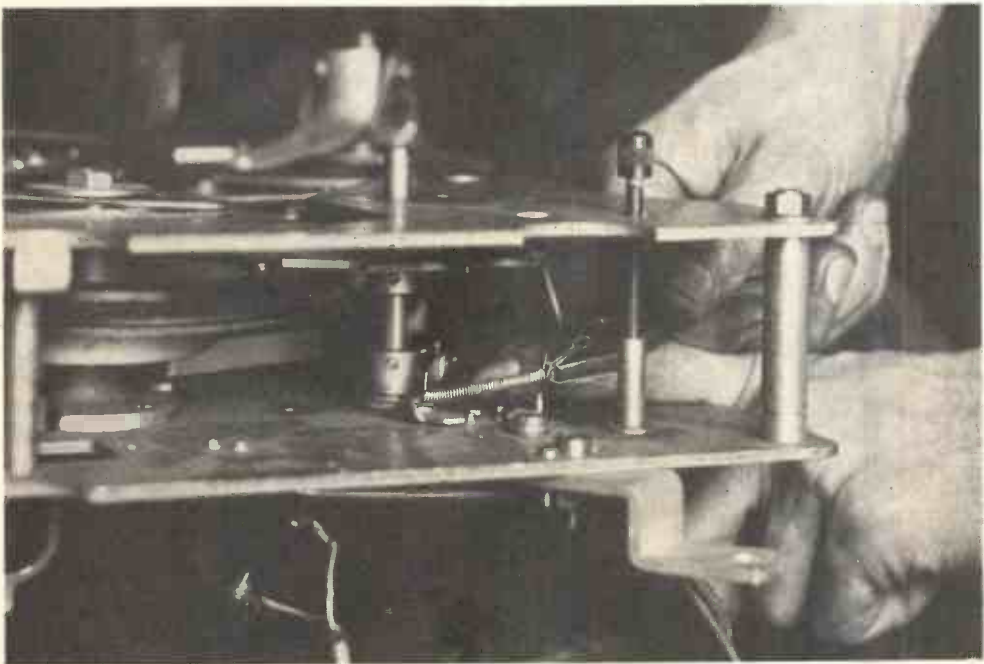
ADJUSTING THE MOTOR SWITCH SPRING ARM.
